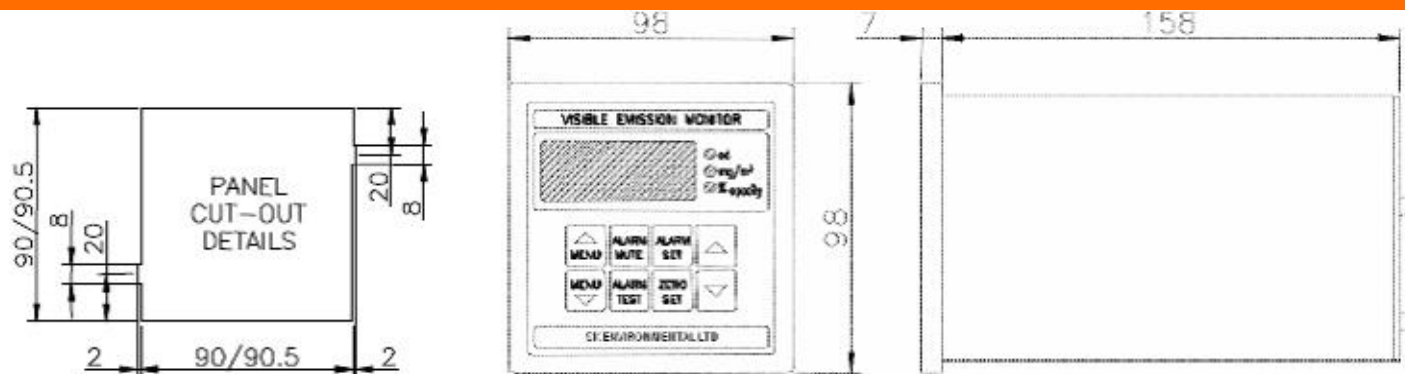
PANEL-UNIT AND CUTOUT DIMENSIONS
